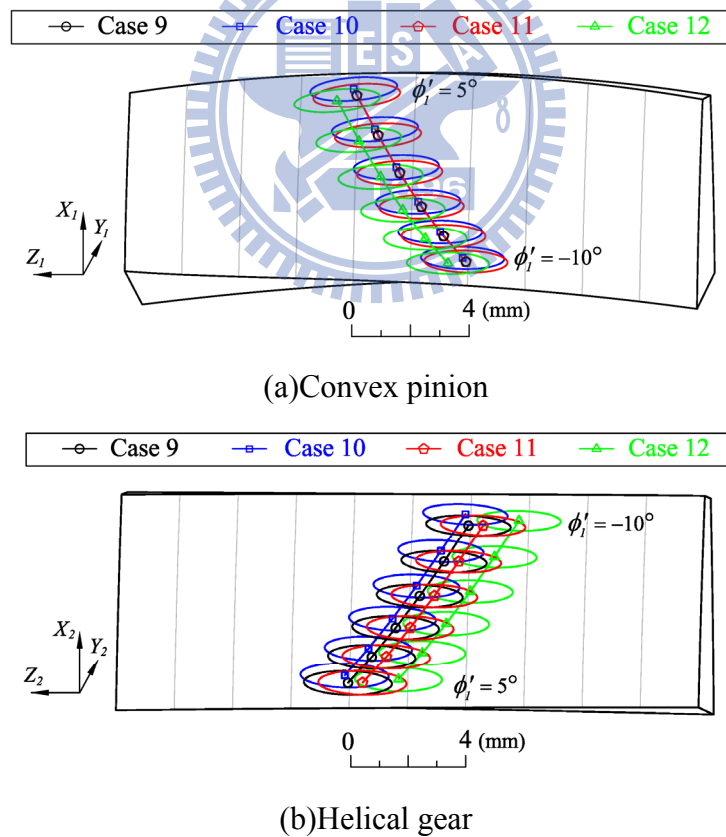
Contact ellipses and contact loci on tooth surfaces of the gear set under parallel axes mounting mode and different assembly conditions
